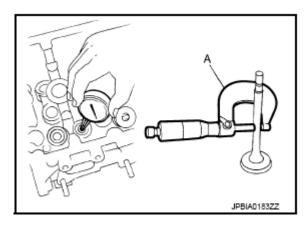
Measuring Inner Diameter Of Valve Shim Using Micrometer Courtesy of NISSAN NORTH AMERICA, INC.
